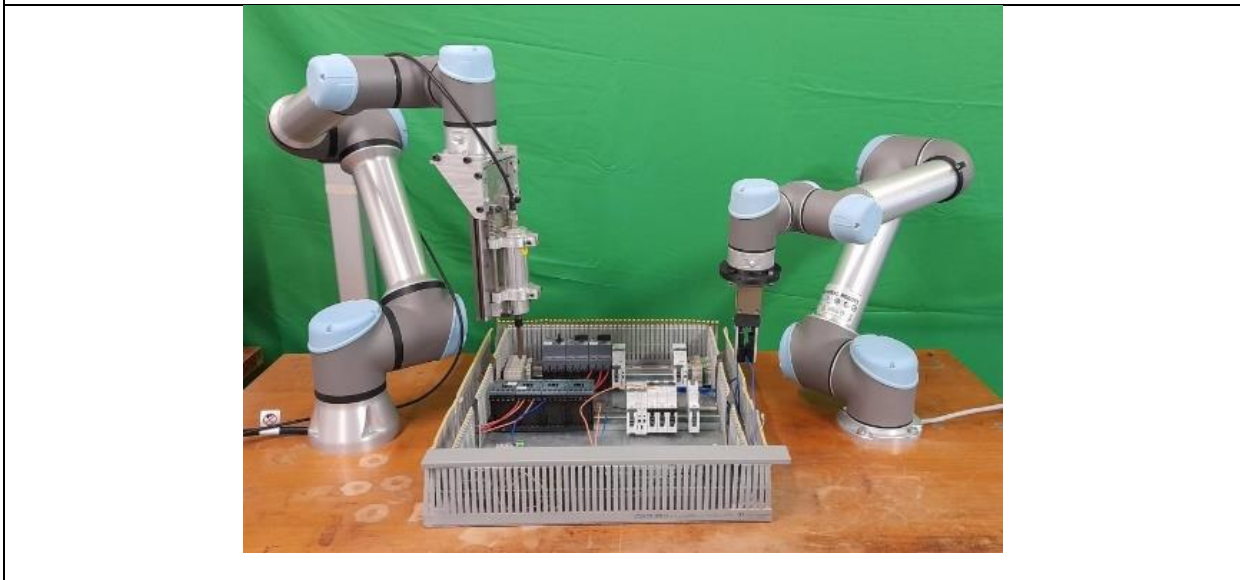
The platform developed by UNIBO for Switchgear cabling (UC1).
